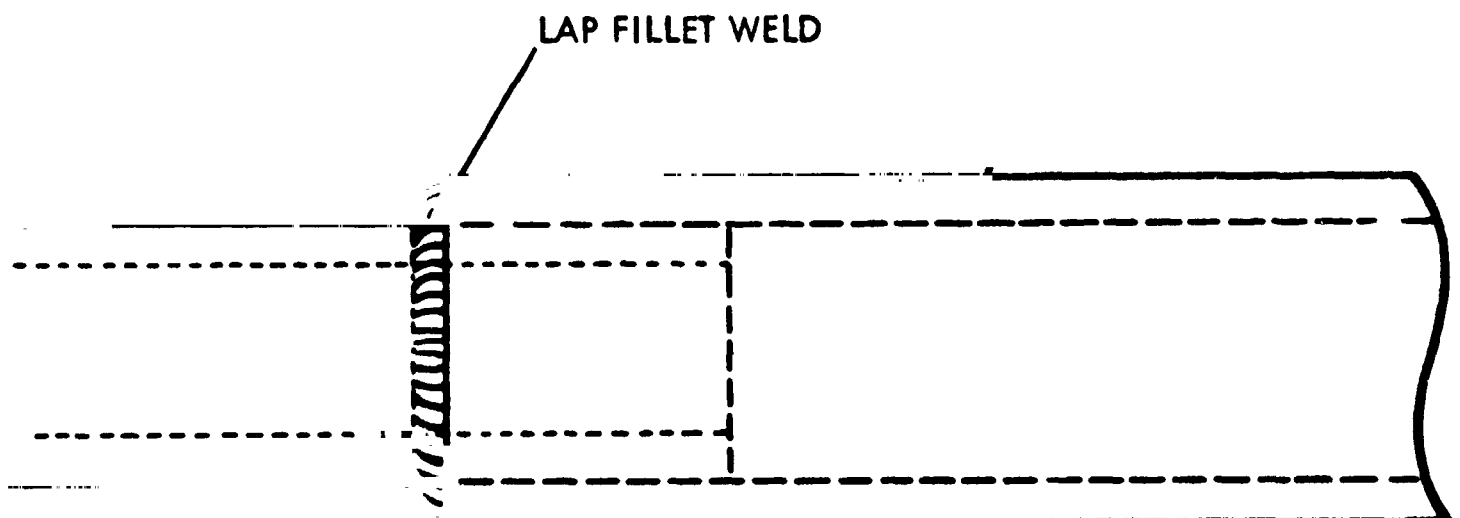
Lap-Fillet Weld Tube Specimen (Manual and Machine)
